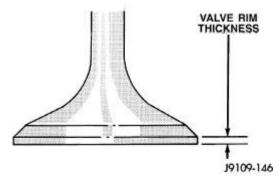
Measuring Points Of Valve Margin (Rim Thickness) Courtesy of CHRYSLER GROUP, LLC
